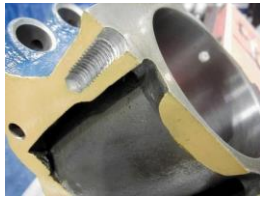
Notice on this cutaway engine block that some of the head bolt holes do not extend too far into the block and dead end. Debris can accumulate at the bottom of these holes and it must be cleaned out before final assembly.
